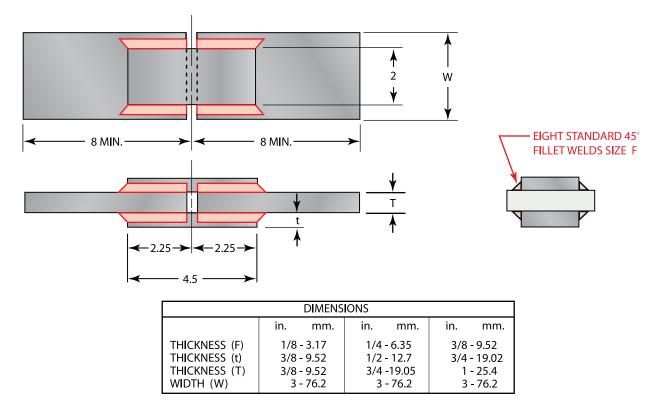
Longitudinal fillet weld shear specimen.
